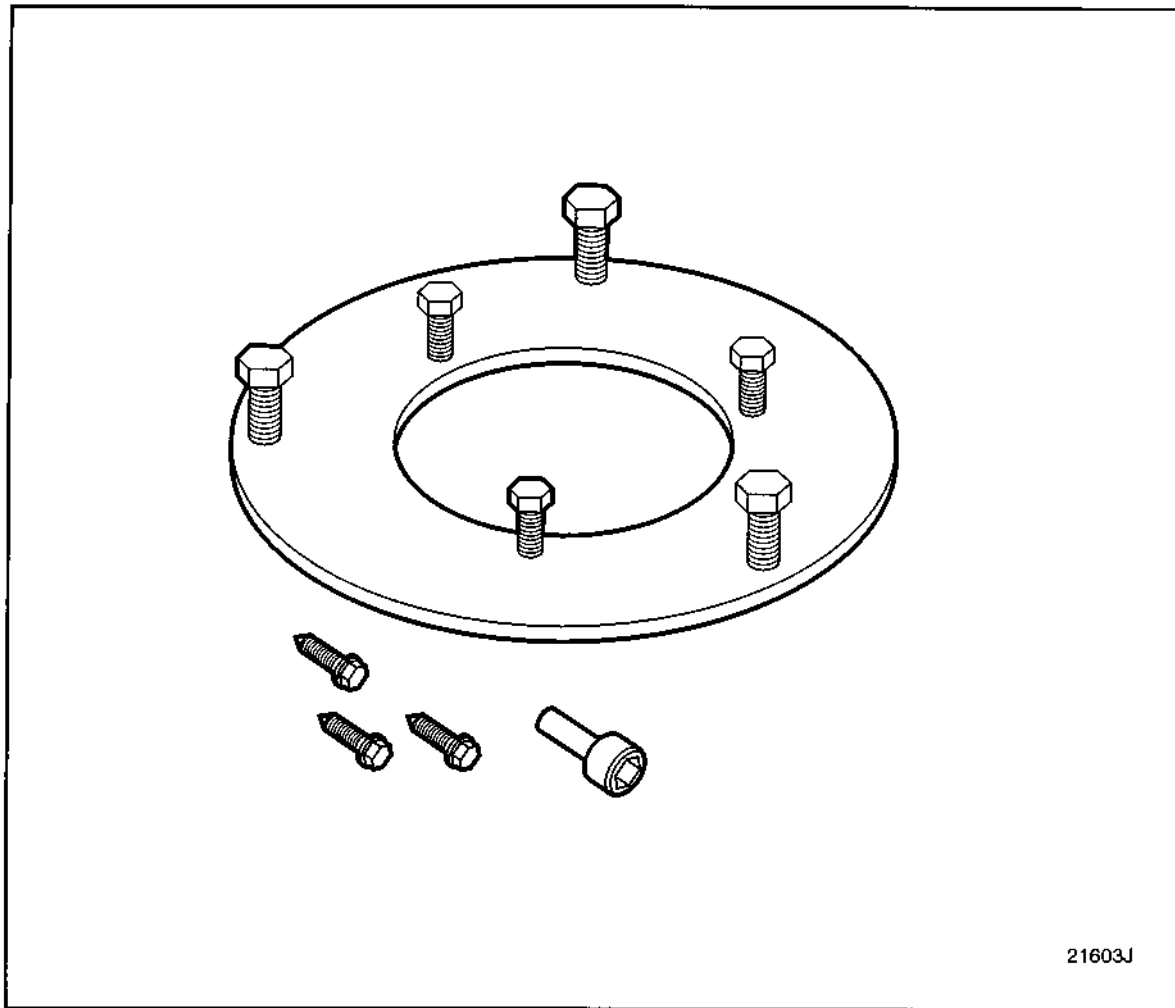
Crankshaft Oil Seal Remover,J 35993
